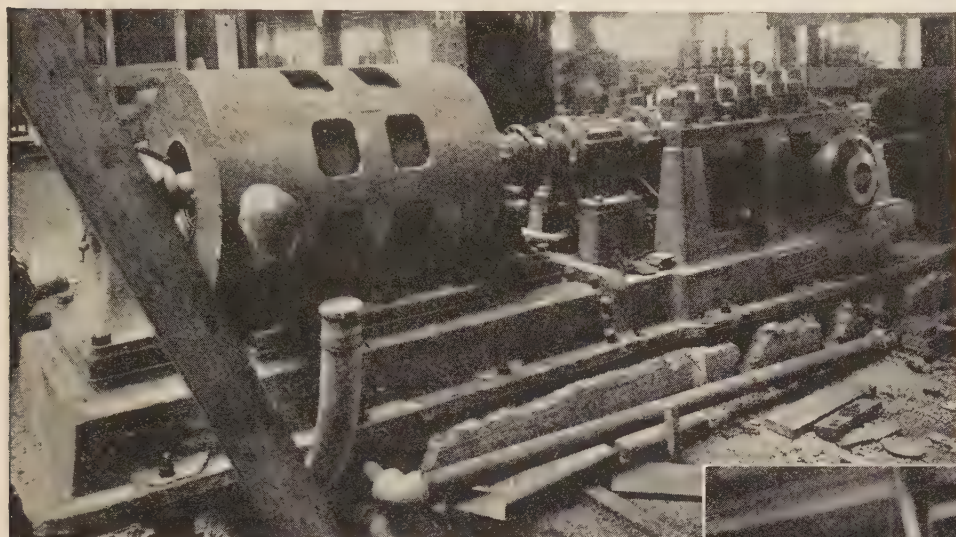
THE ABOVE MOTOR DEVELOPS 1250 HP. AT 3600 REV. PER MIN. TO THE RIGHT IS THE ROTOR OF ONE OF THESE MOTORS
